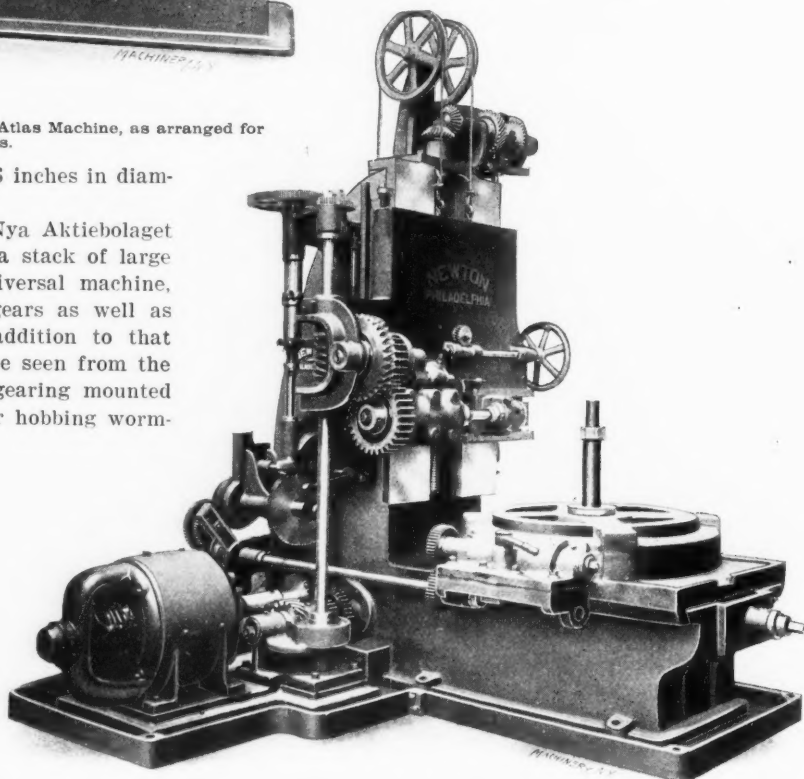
A Newton Machine, especially designed for the Cutting of Heavy Motor Gears and Pinions.
